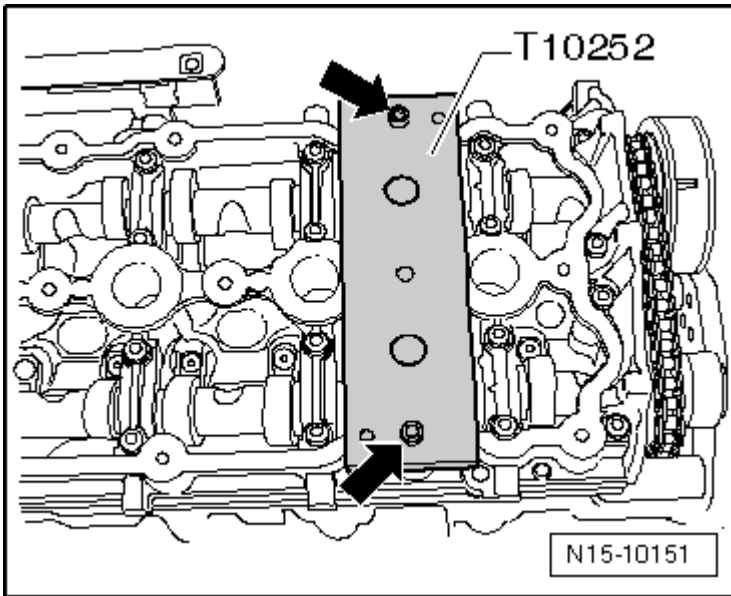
Identifying Camshafts Secured Using Camshaft Locator T10252
